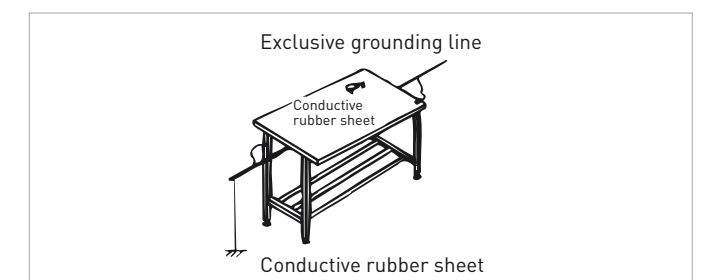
Battery-mounted PC boards were inadvertently brought into contact with spacers and a conductive rubber sheet. The battery charge was exhausted.
